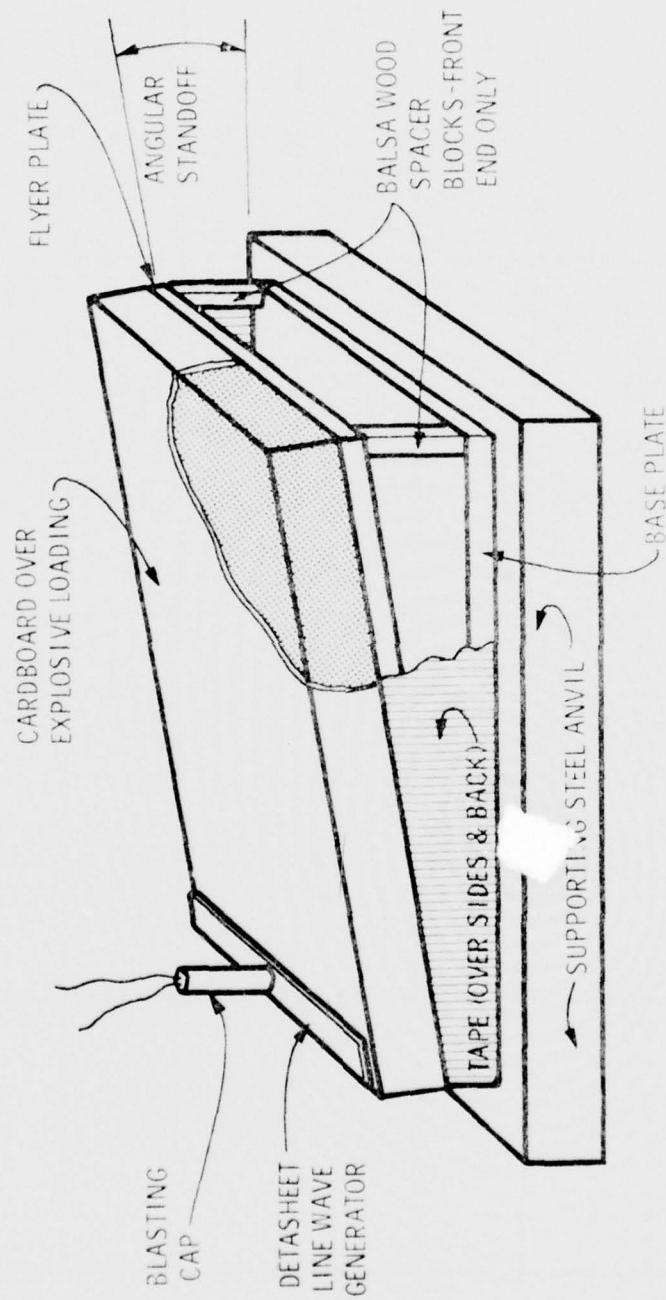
Component Configuration for Preset Angle Geometry Welding
